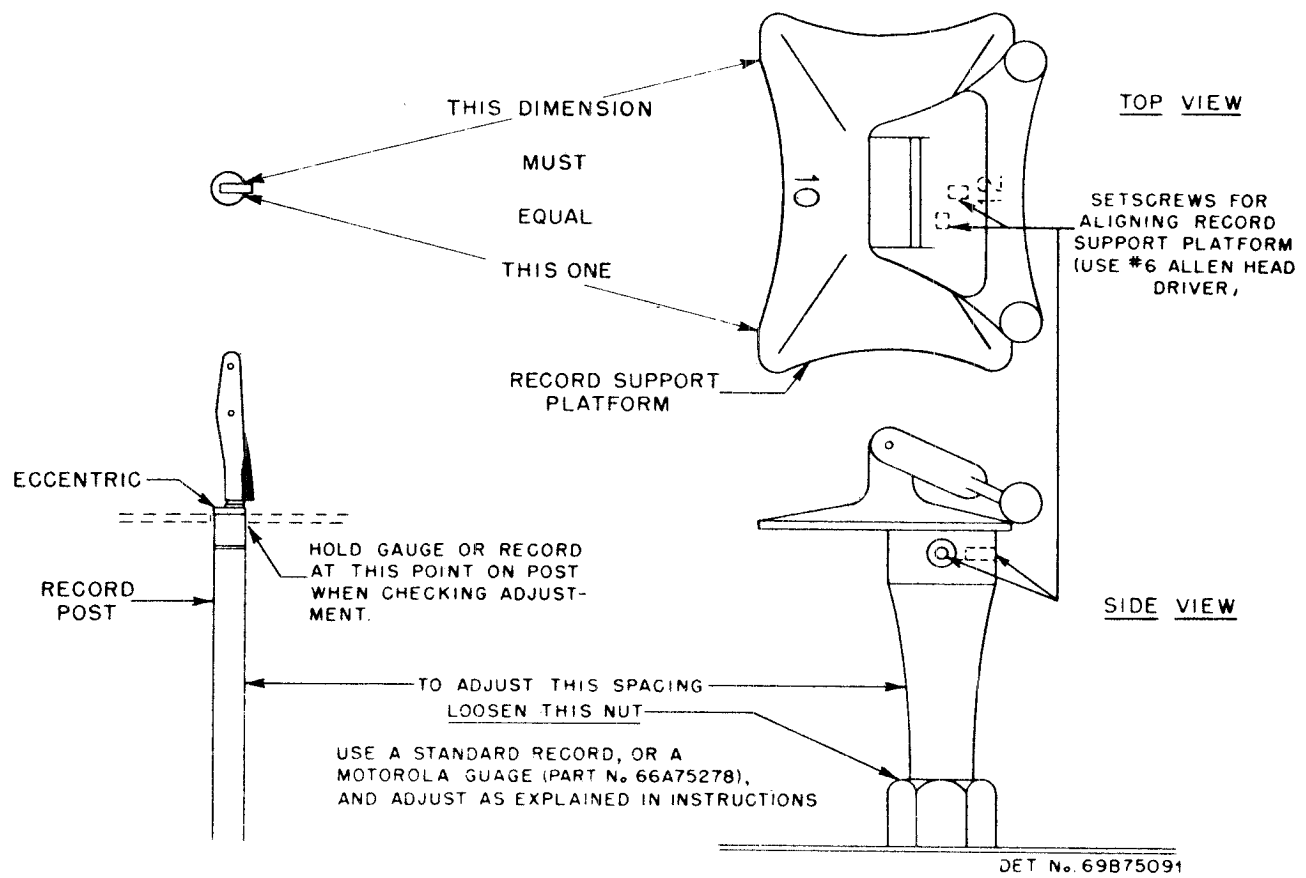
RECORD SUPPORT PLATFORM ADJUSTMENT DETAIL
